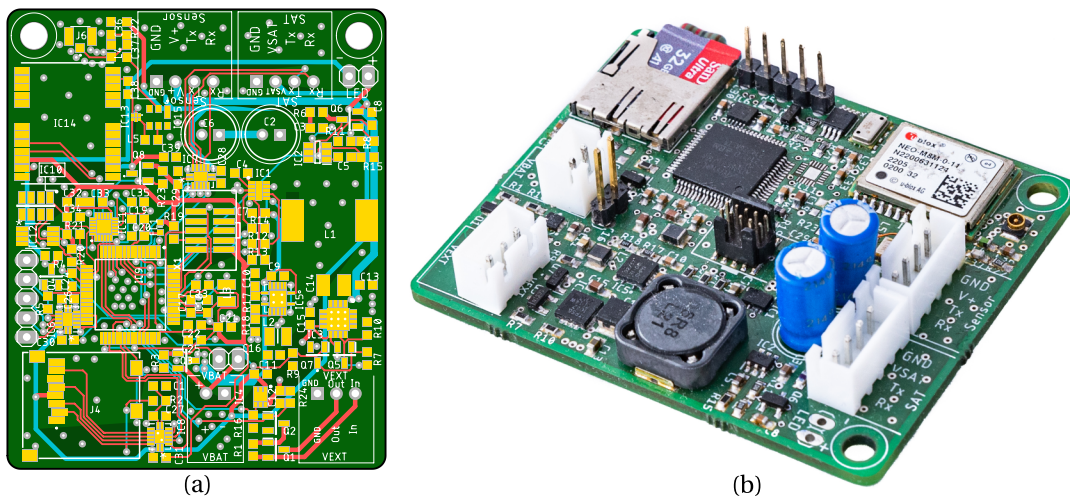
Implemented main-board layer-design (a) and assembled PCB (b).
